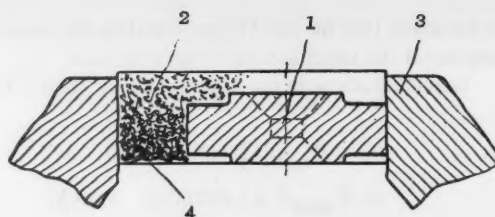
A method of mounting the blade before the building up of alloy layer: 1) blade; 2) flux; 3) clamps; 4) box.
